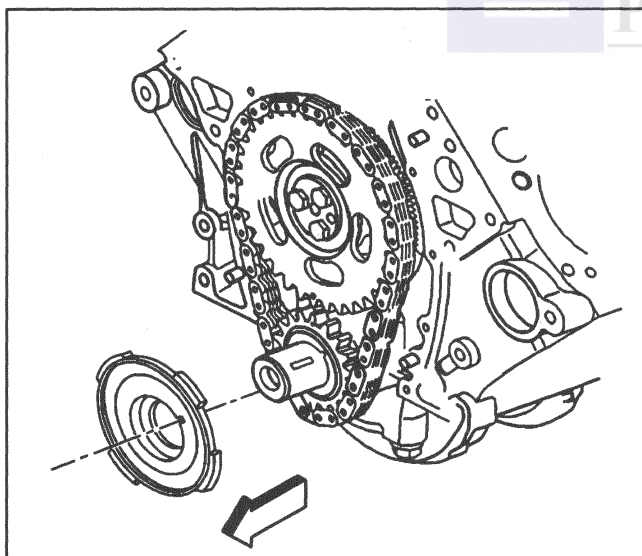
Crankshaft Position Sensor Reluctor Ring
